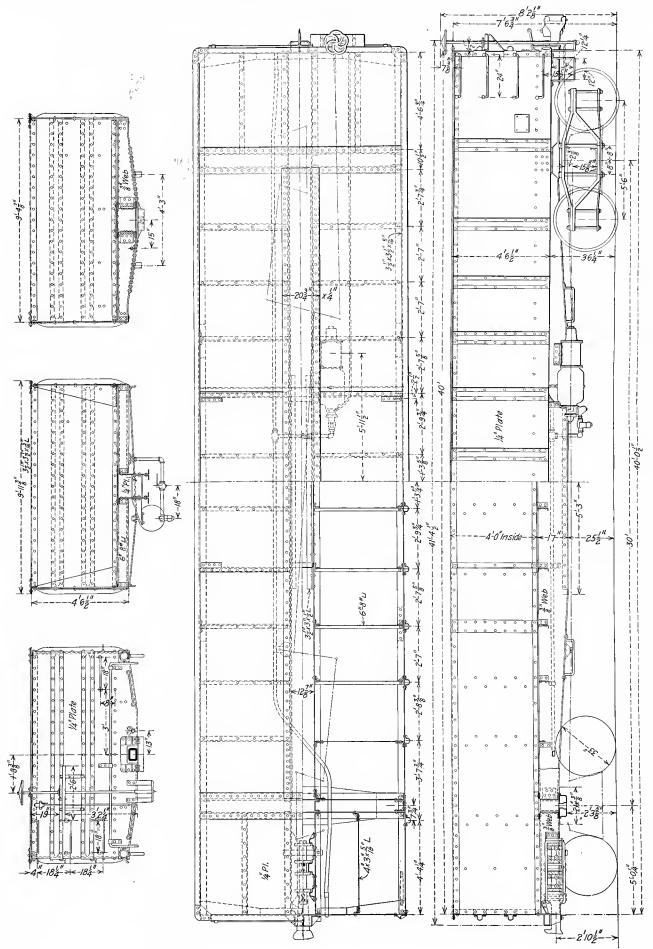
End Elevation and Cross Sections of Baltimore & Ohio All-Steel 50-Ton Capacity Hopper
